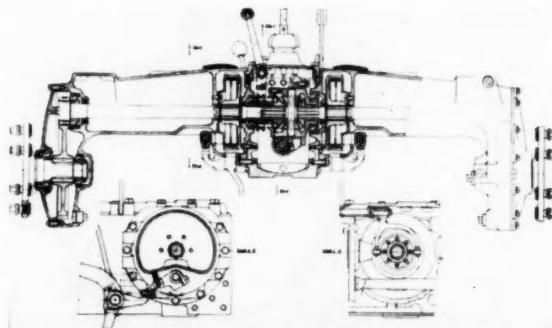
Differential and final drive with drop housings of ZF rear axle (Friedrichshafen Gear Works)
